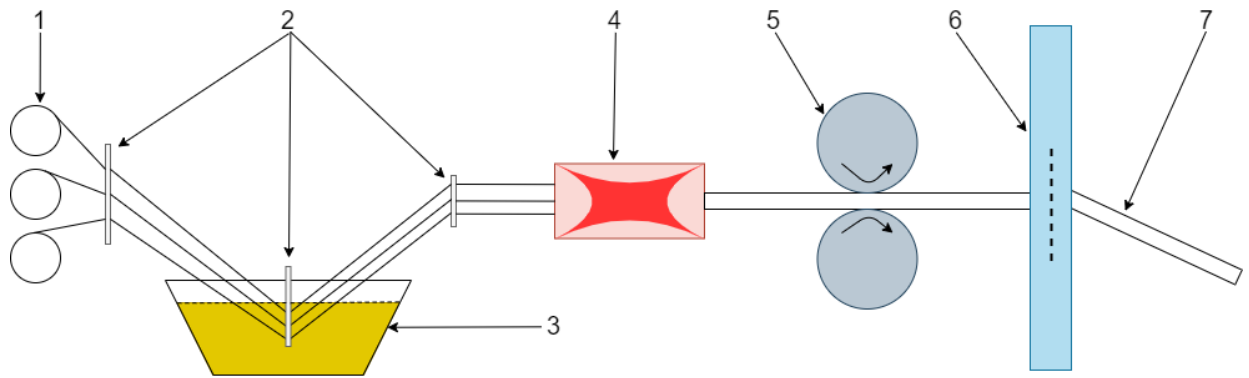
Pultrusion unit: 1- fiber, 2 - preforming guides, 3- resin bath, 4 – heated die ,5 – pulling device, 6 – cutting machine, 7 – produced item.
